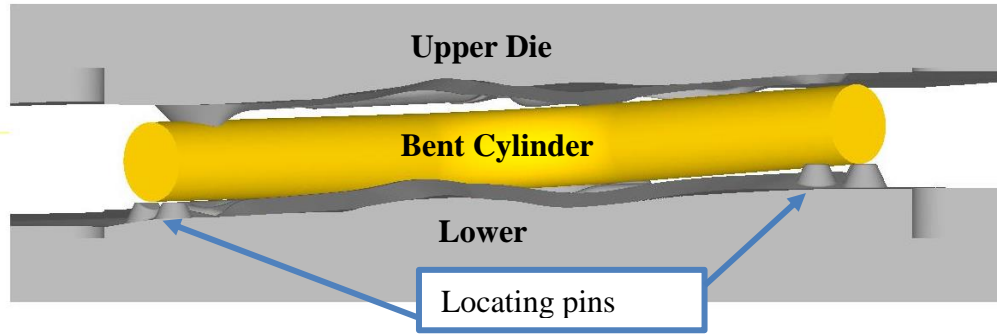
X-sectional view of the forging simulation setup in DEFORM 3D.
